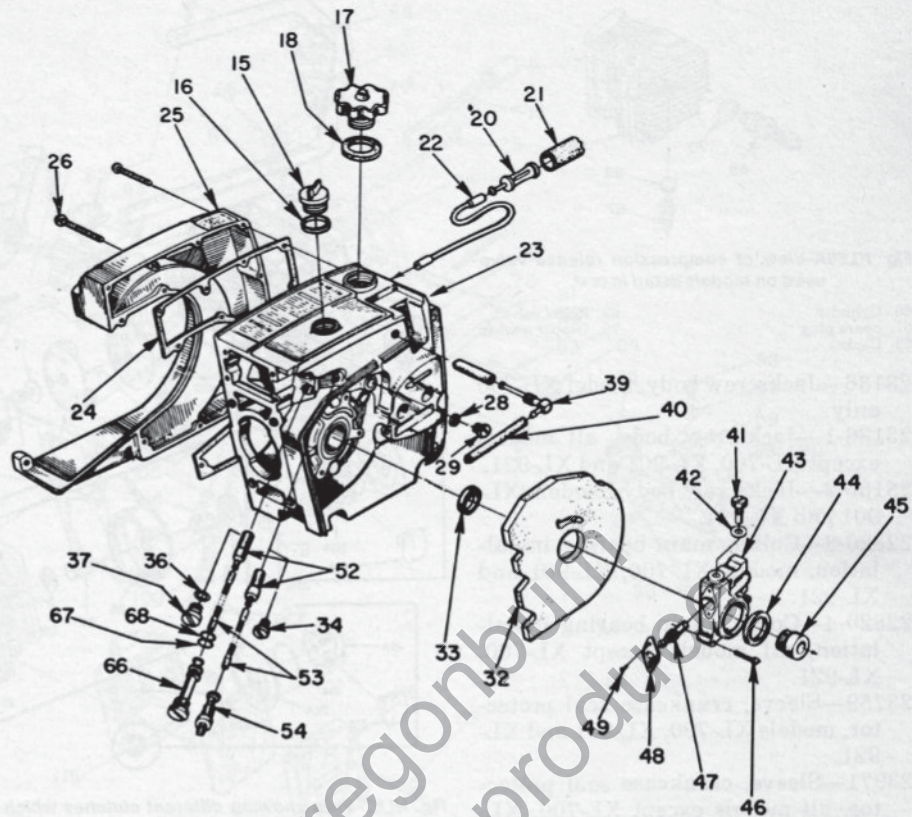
Exploded view showing automatic chain oiler pump, manual and automatic oiler pick-ups, crankcase and oil reservoir and fuel tank. Automatic oil pump plunger (47) and pump body (43) are available as a matched set only. Plug (34) is used to seal opening when saw is not equipped with manual chain oiler; plug (37) and washer (36) are used on models not equipped with automatic chain oiler. On late models, fuel tank cover (25) is sealed to crankcase and chain oil reservoir with gasket (24); early units were equipped with integral epoxied unit.
